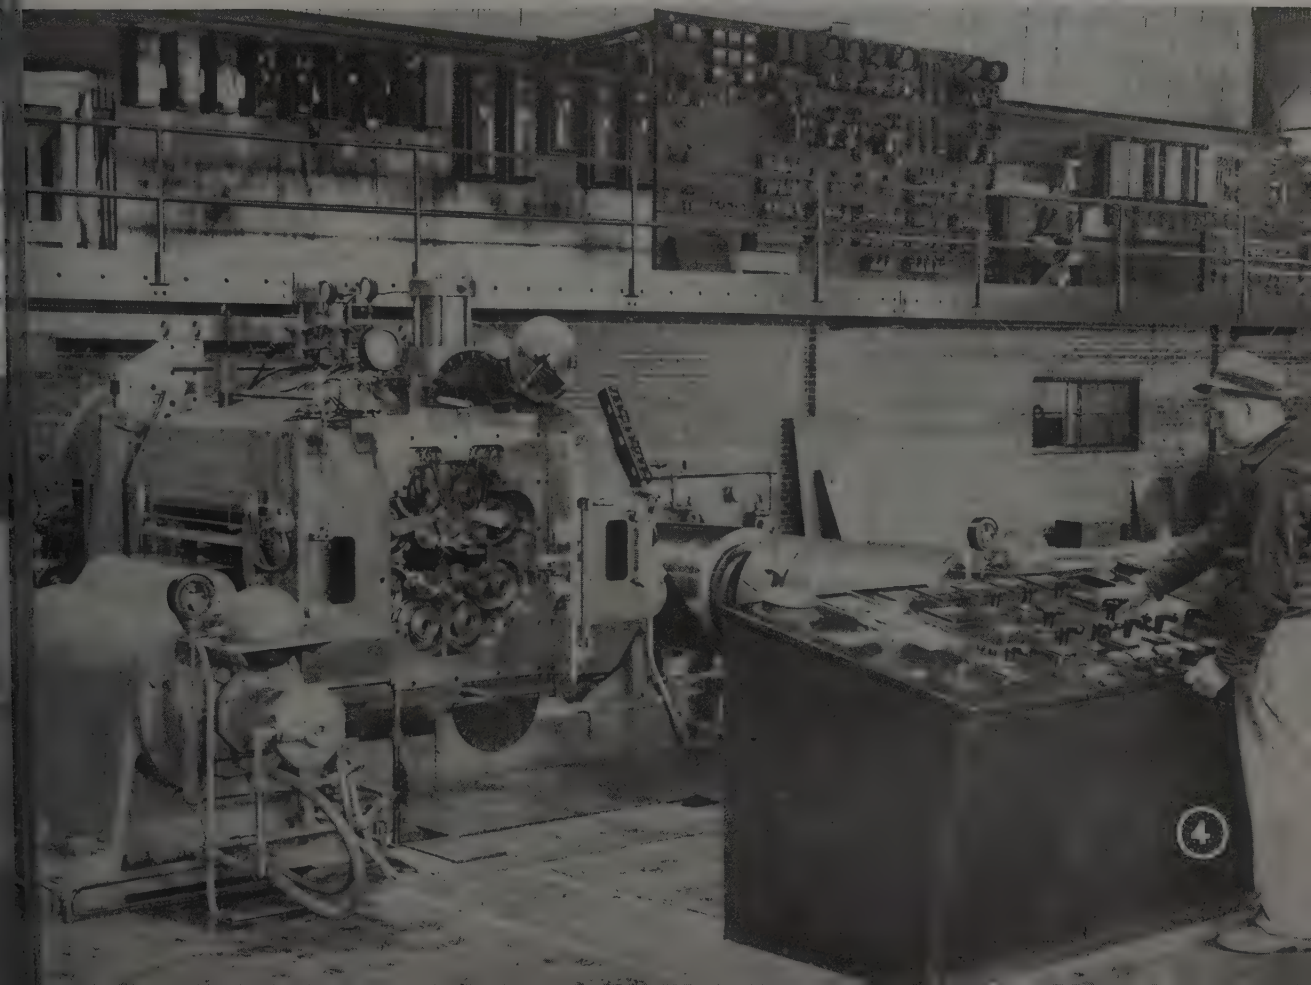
Another view of cold-reduction mill which accommodates stock up to 37 in. wide. Present schedules call for gage reduction from 0.135 to 0.010-in. in eight passes
